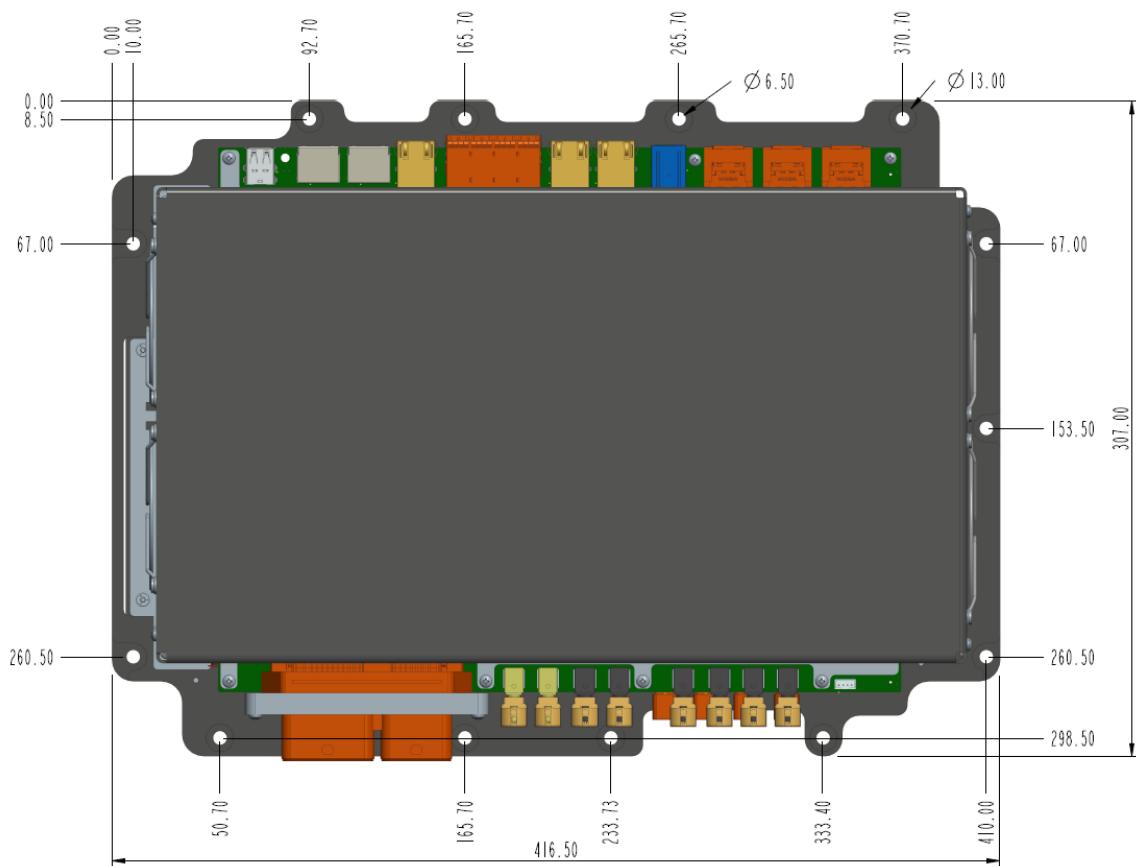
Baseplate Mechanical Dimensions and Developer System Top View
